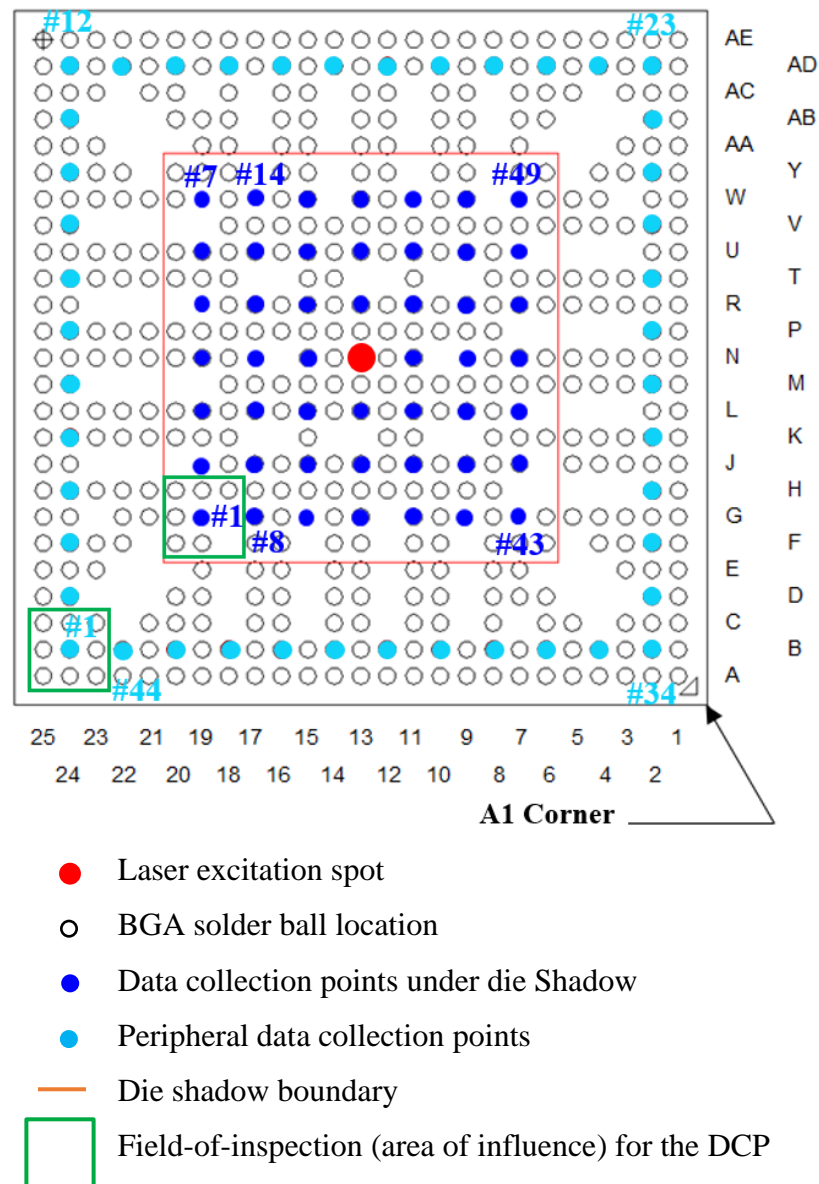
Inspection pattern for Type – A 17 x 17 FCBGA package
